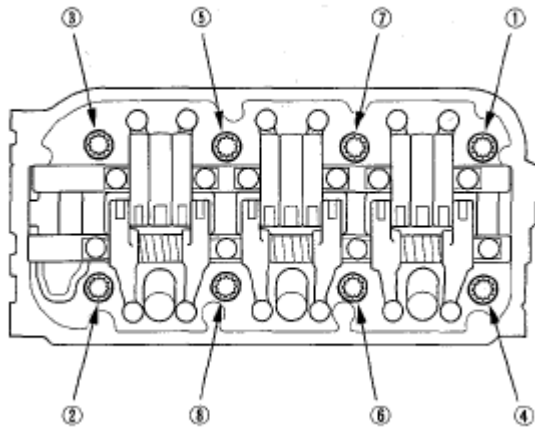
Identifying Cylinder Head Covers Bolts Loosening Sequence
